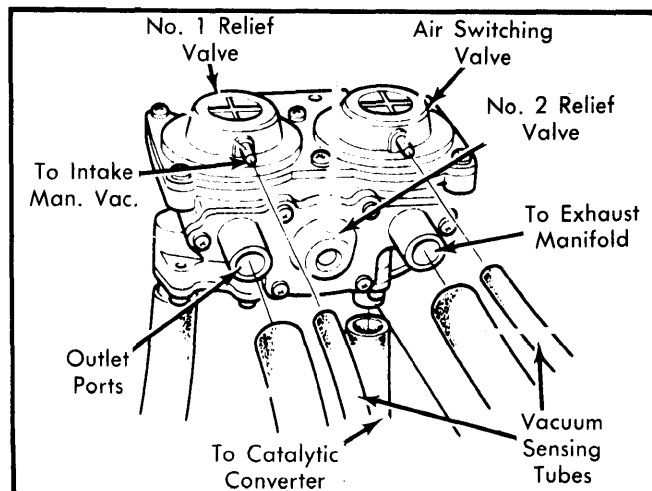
Testing Mazda B2000 Air Control Valve
